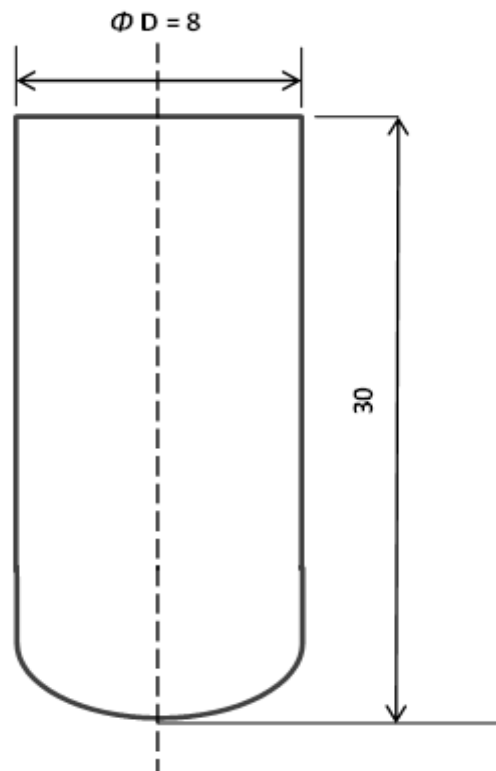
Drawing, AISI D3 Steel pin (all dimensions are in mm)
